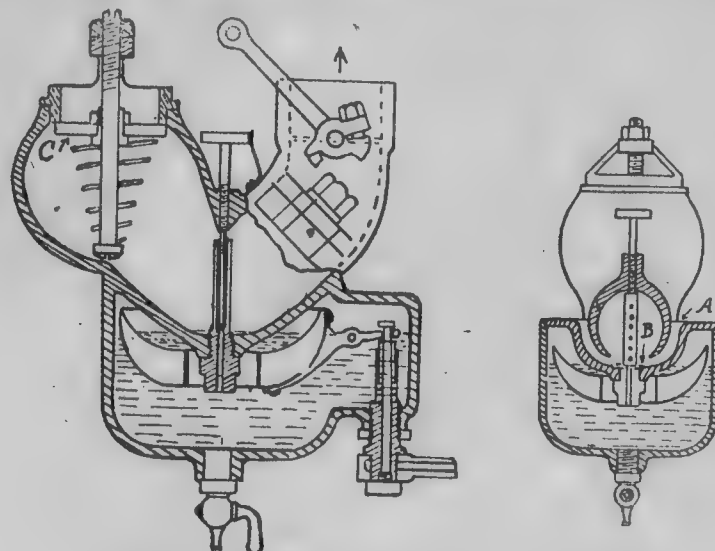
Combined Surface and Spray Jet Carburetor.
